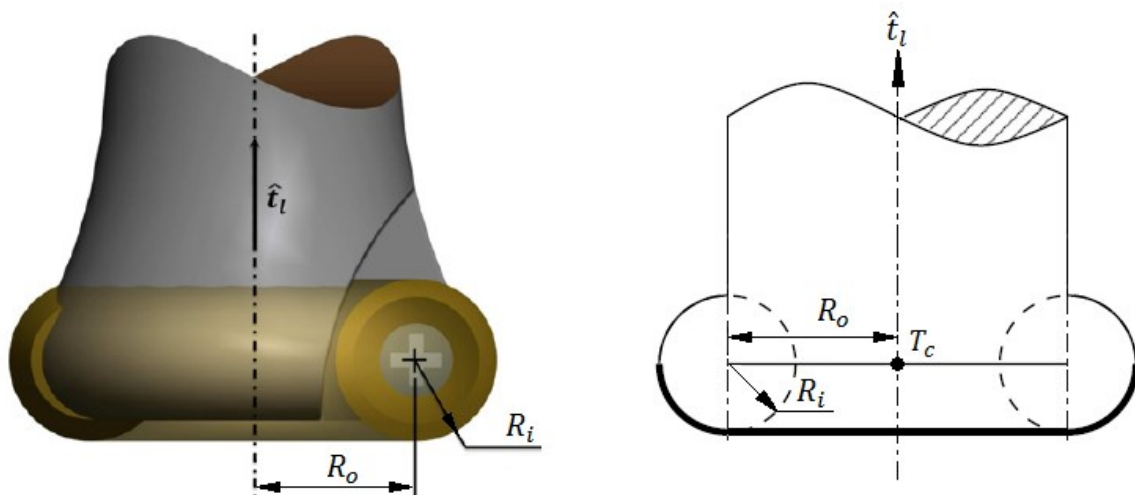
(a) 3D model of an industrial radiused end mill cutter, and (b) geometry of a generalized radiused end mill.
